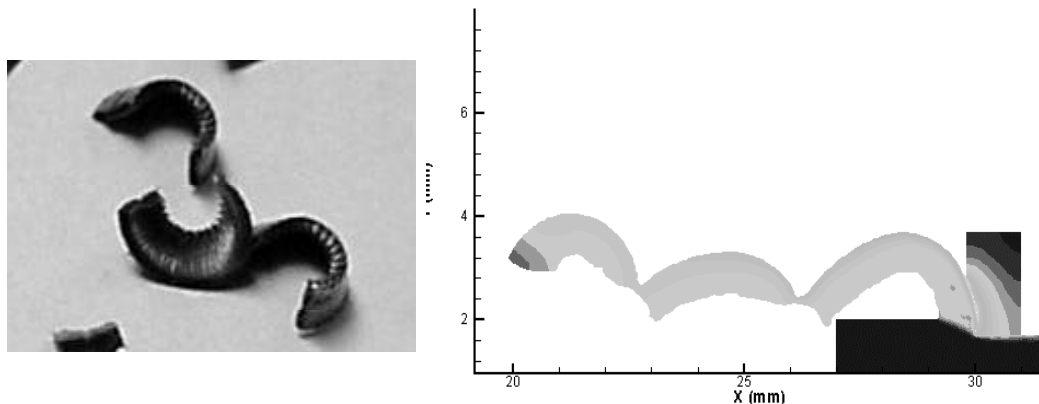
Location of defect in chip due to bending stresses induced by contact with the workpiece.
